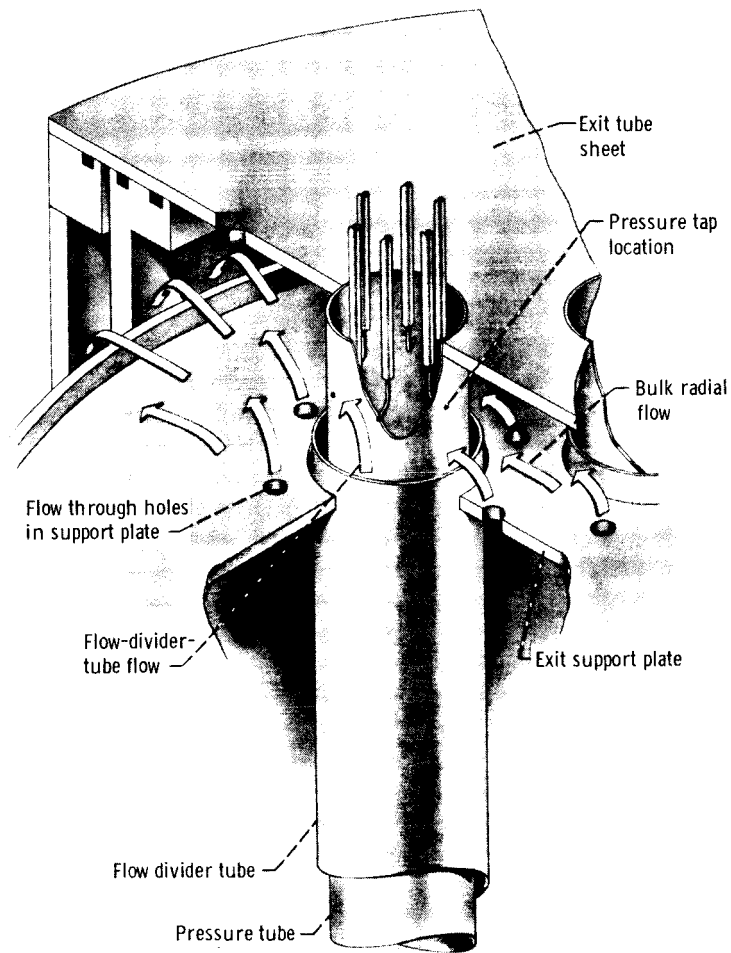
Enlarged view of exit-crossover region showing tube at outer edge of core.
